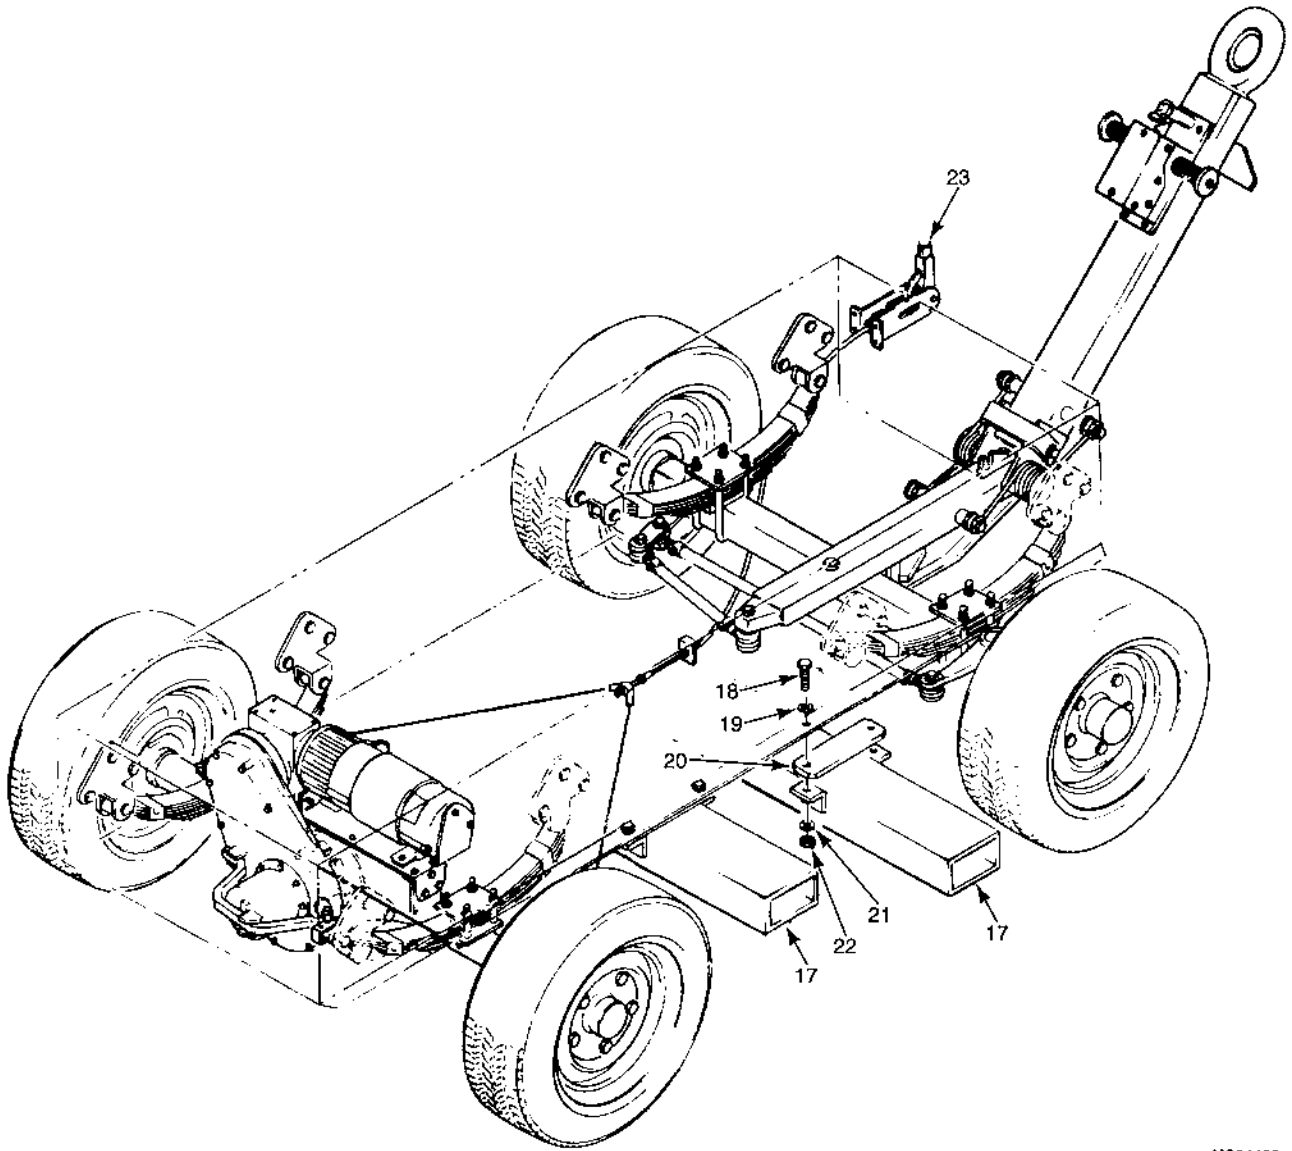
Fuel Tank Removal (Sheet 1 of 2).
